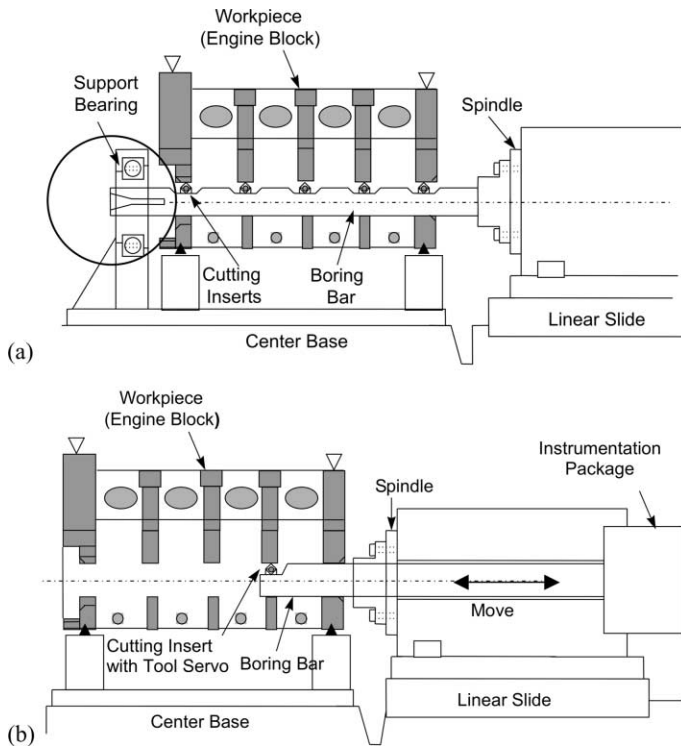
Structure of line boring machines: (a) conventional line boring tool with outboard support and multiple cutting inserts, (b) concept design of Smart Tool line boring system.
